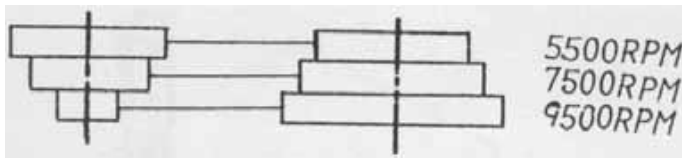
Belt Wheel Variable & Stepped Adjustment
